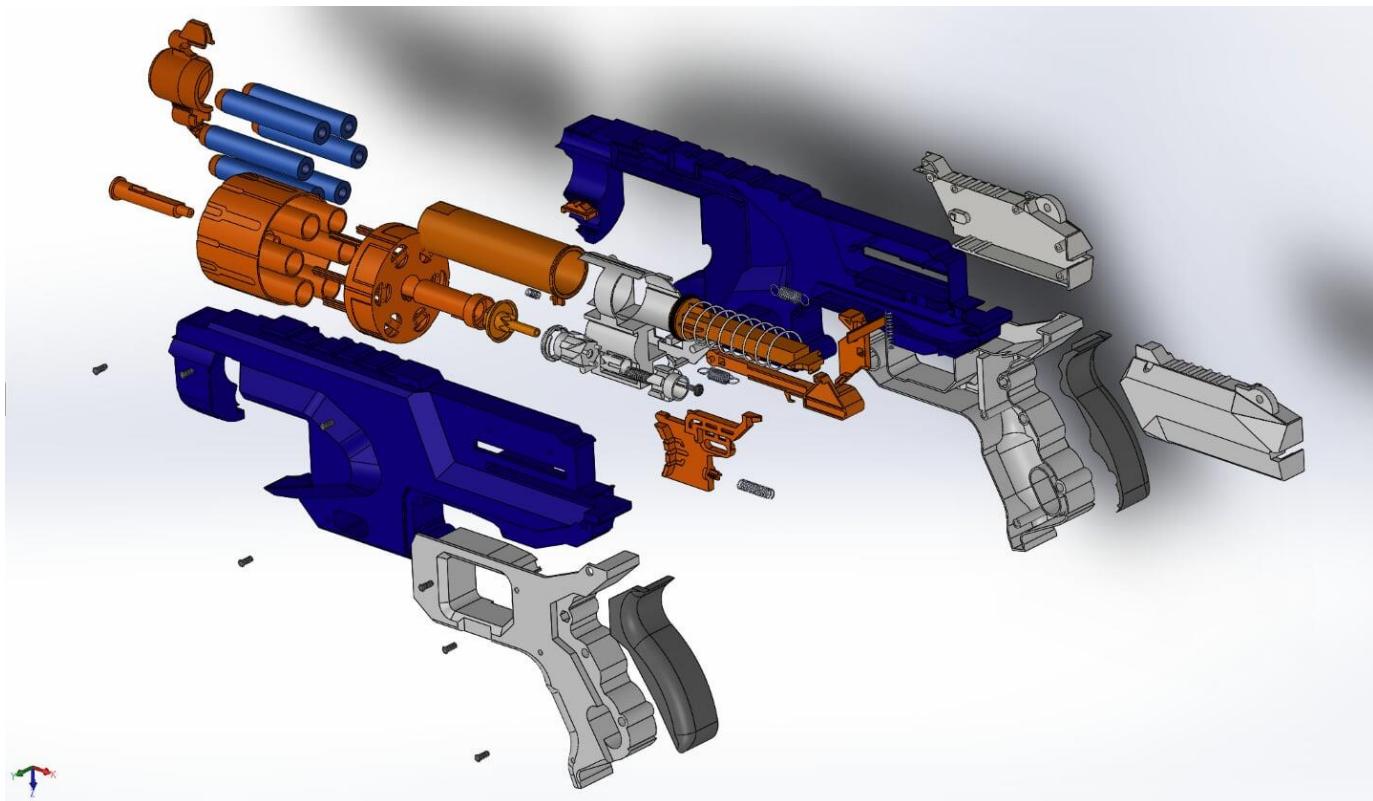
Exploded assembly of entire 3D SOLIDWORKS model
